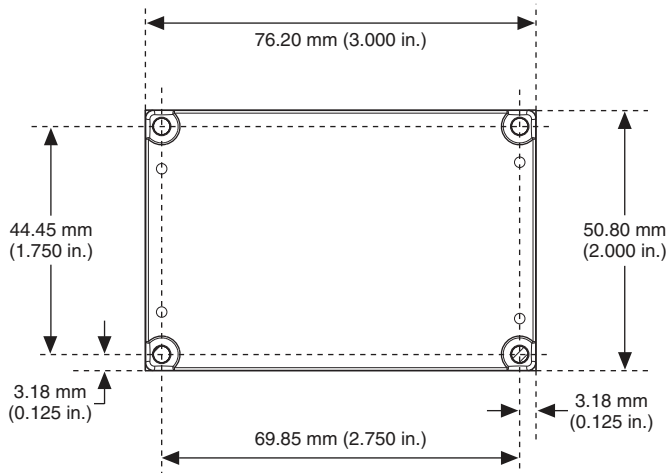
sbRIO-9651 SOM Bottom View with Dimensions
